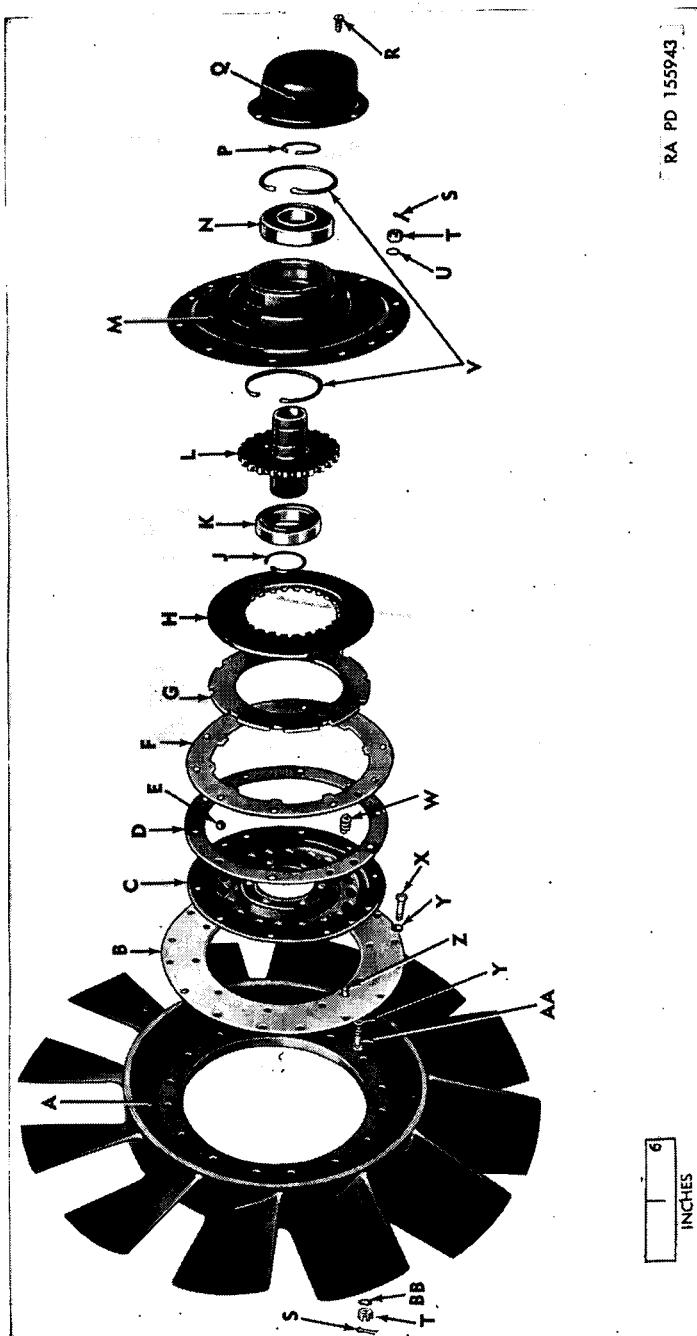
Cooling fan and fan clutch assembly—exploded view.
